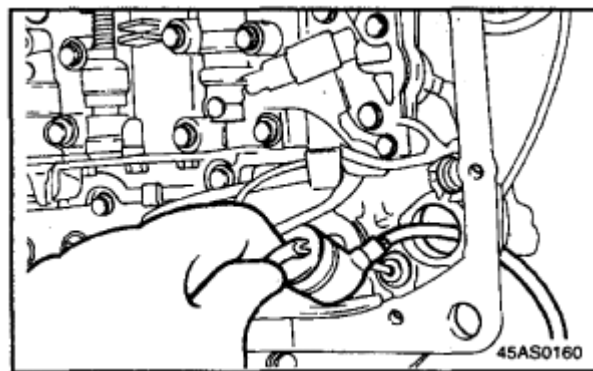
Removing Clip Of Solenoid Valve Harness Grommet
